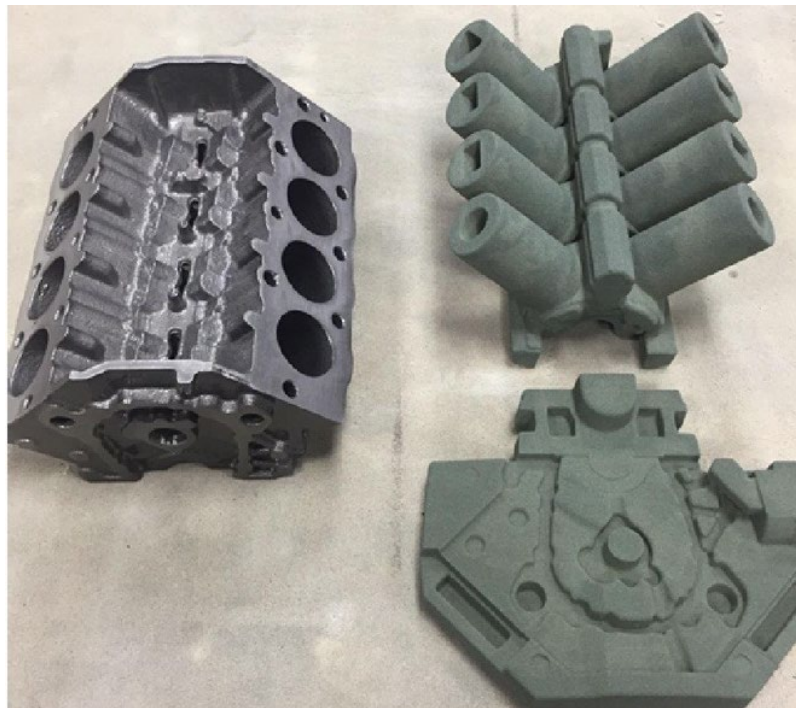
A 3D binder jetted mould was printed and then employed for casting components (18).
